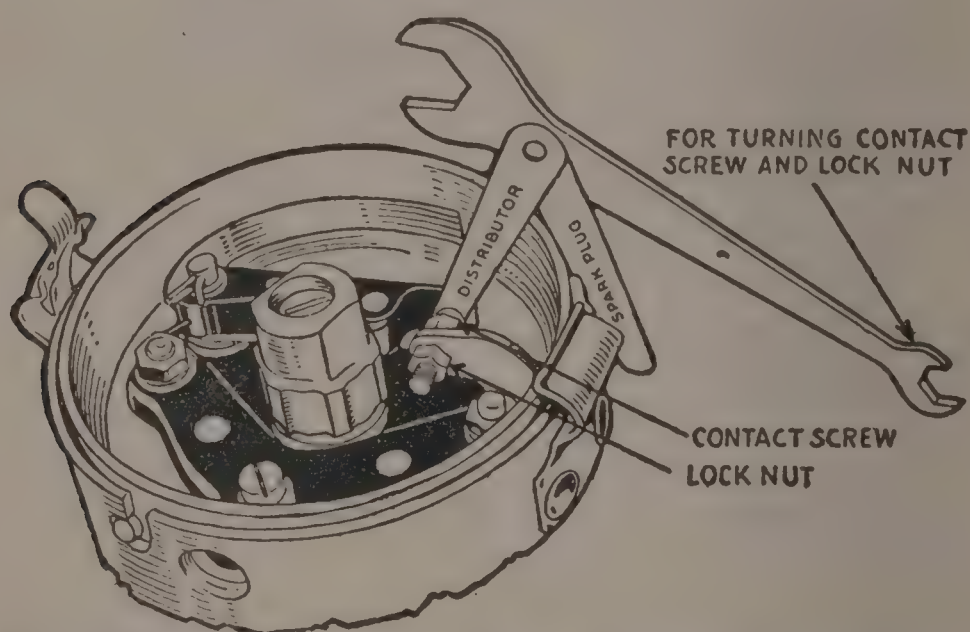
Method of using gage in adjusting contact points of Delco interrupter
